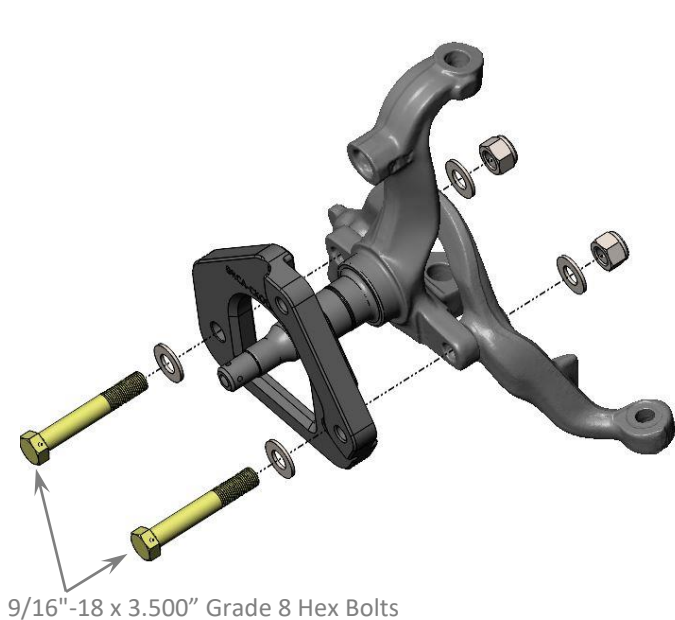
Secondary Caliper Mounting Bracket Assembly Installation Process (LH Shown)
